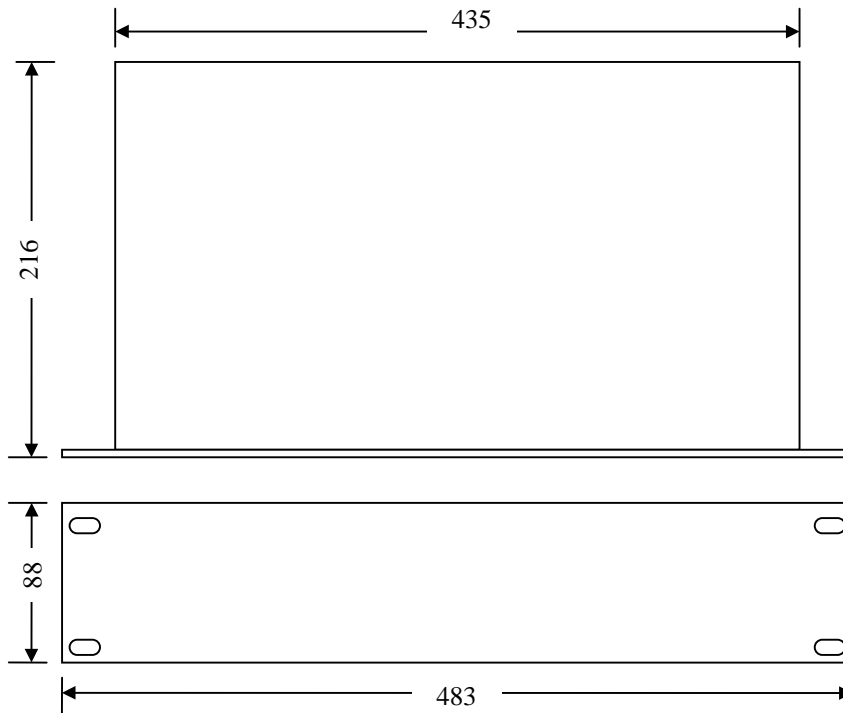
OSD725 MOUNTING DIMENSIONS
